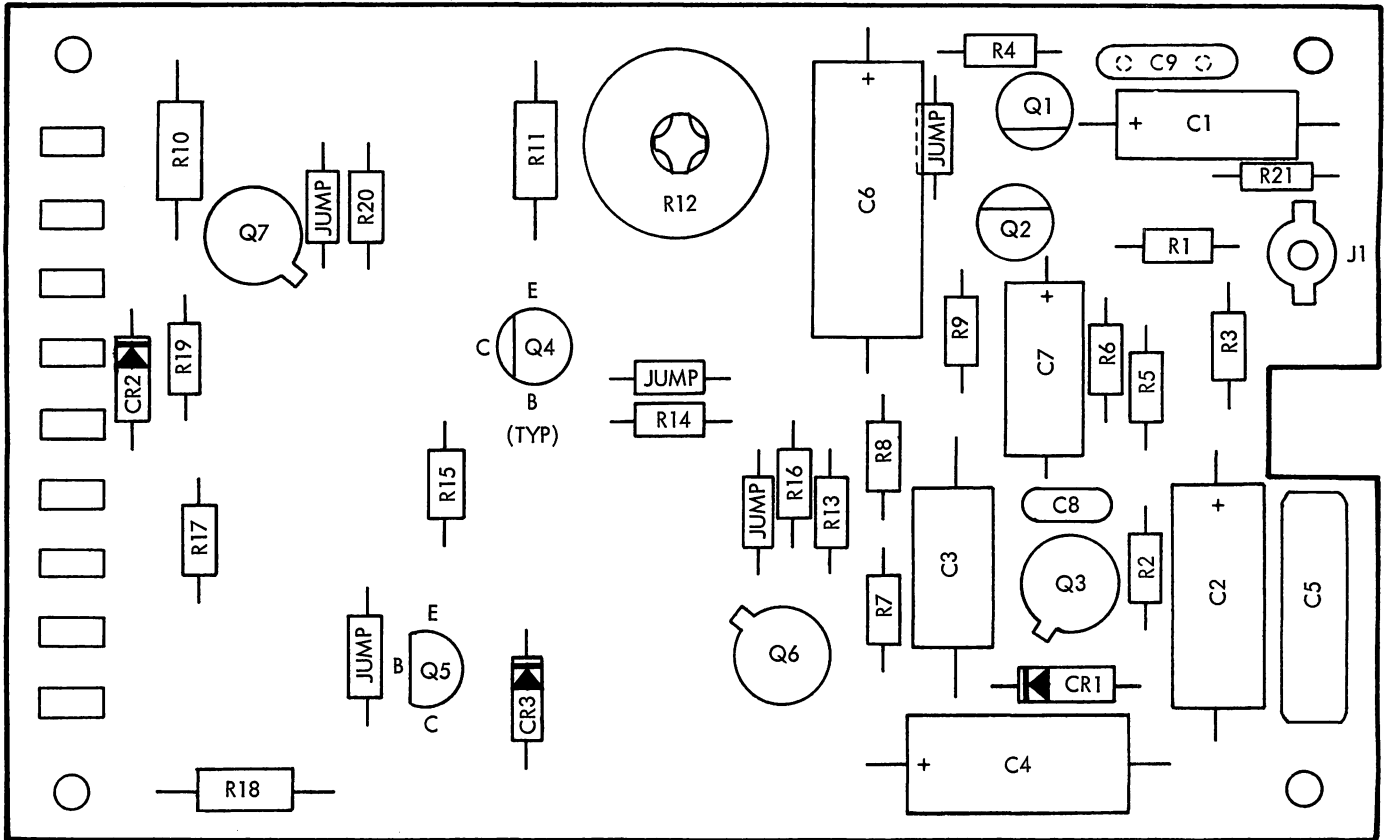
Electronic Part Locations (2C572-3), HF Power Driver PCB Assembly
